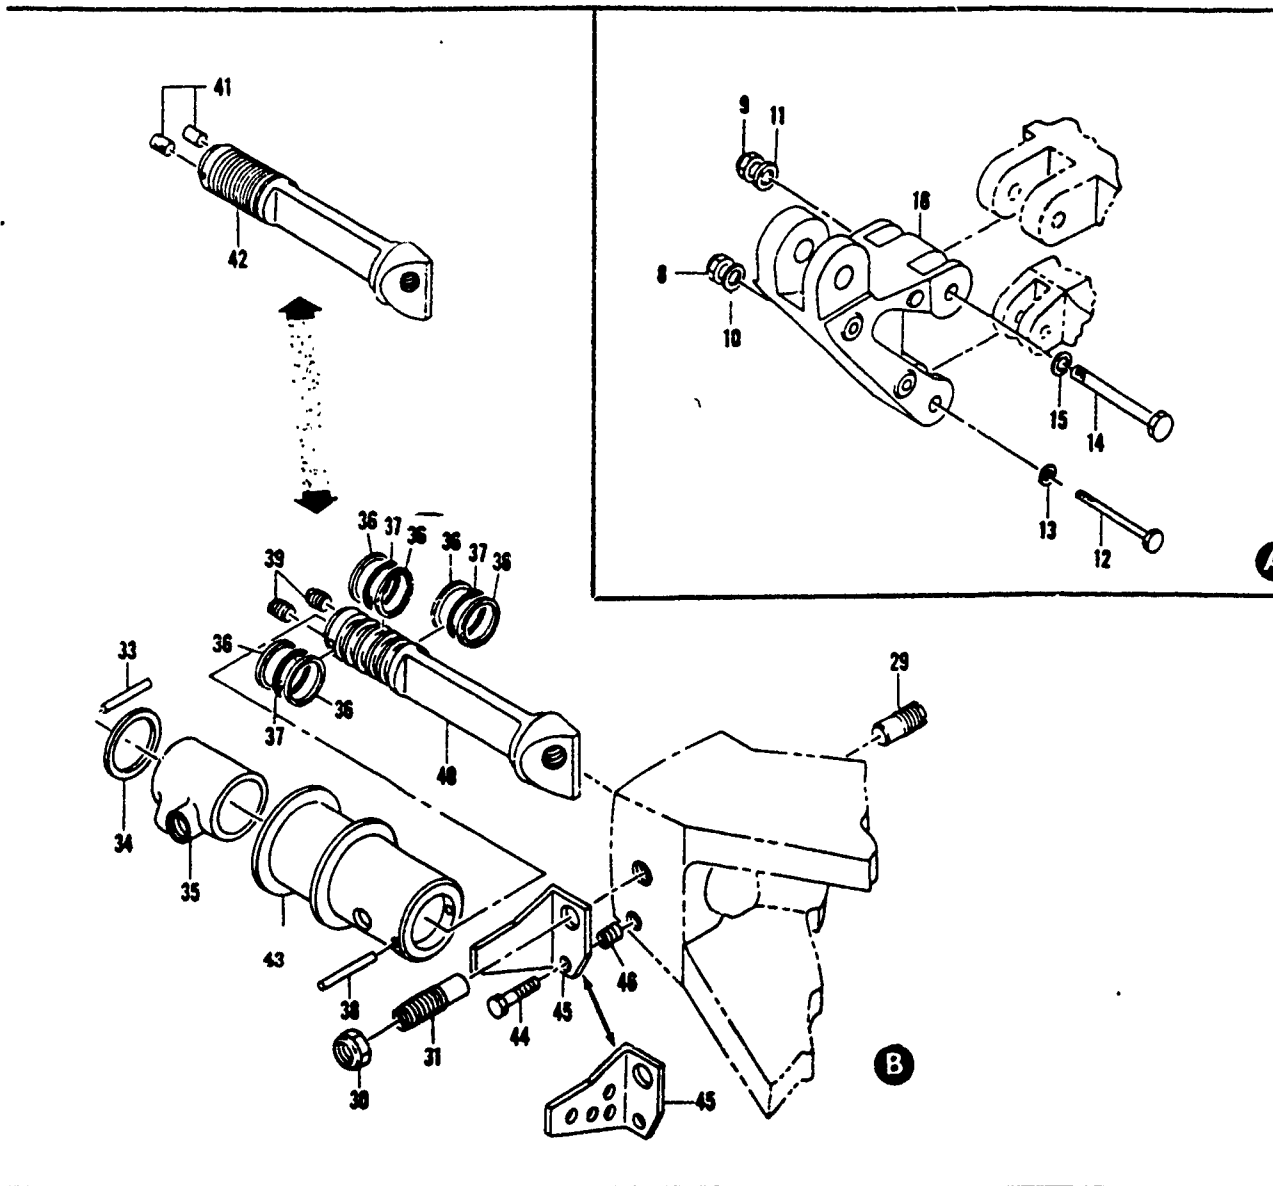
Nose Gear Outer Cylinder Assembly (Sheet 2 of 2)
